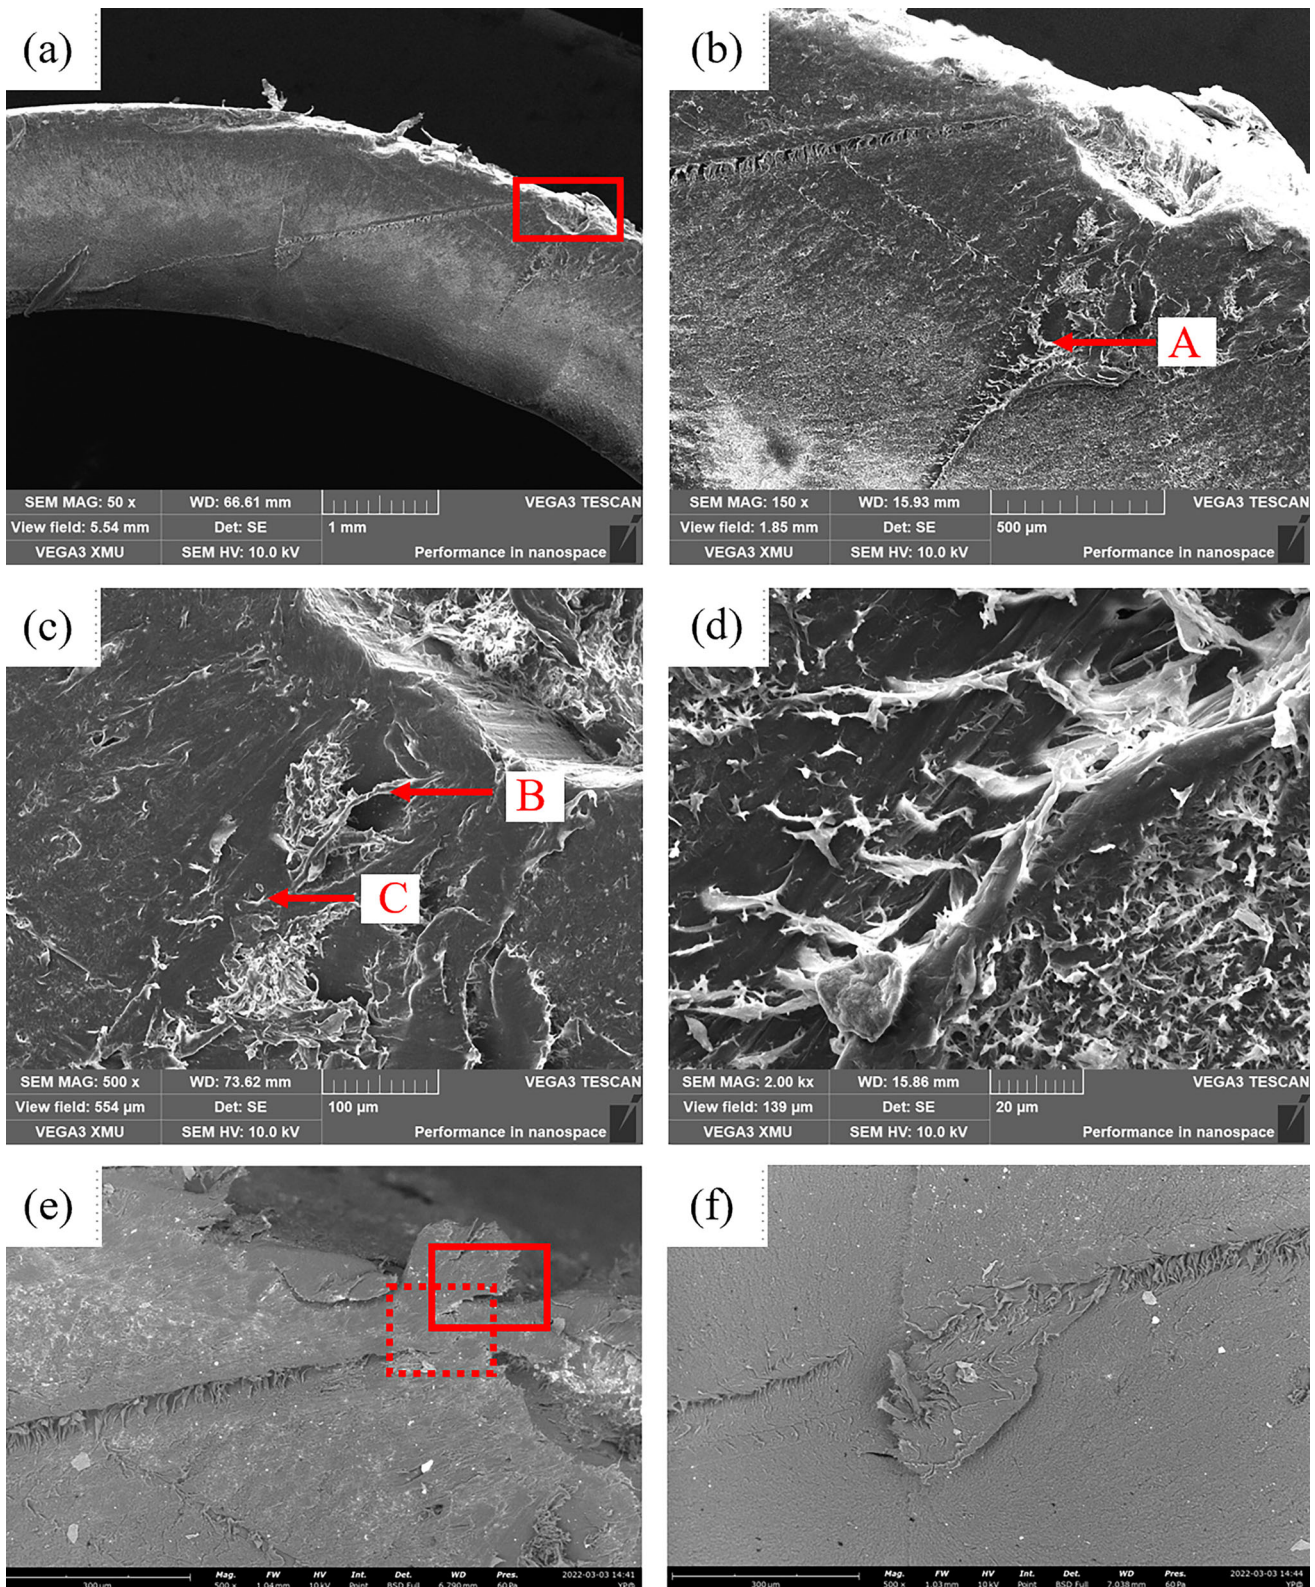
Microscopic morphologies of I side of the failed pipe fracture section. (a) overall appearance (b) appearance of crack initiation source (c) fibrous aggregates and small-sized particles on the fracture surface (d) morphology of the short stripe in the cut-off region (e)
